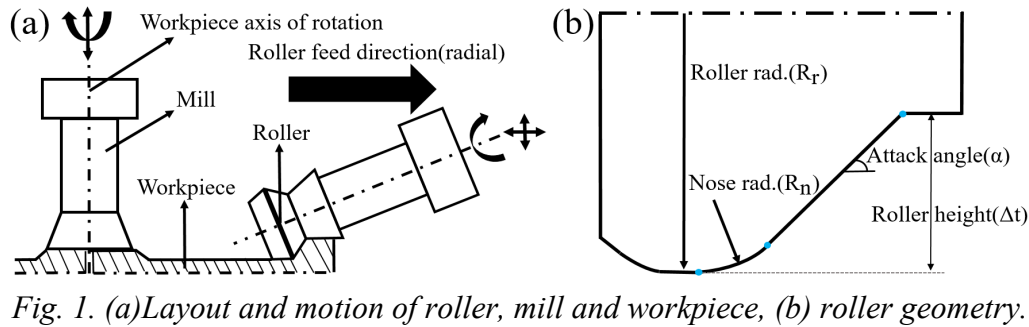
(a) Layout and motion of roller, mill and workpiece, (b) roller geometry.
